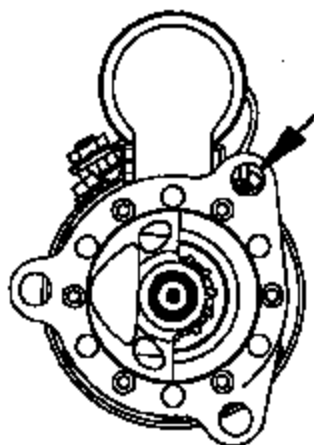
Flange Mounting Hole (Arrow) Aligned with Solenoid Housing Mounting Bolt Shown in the Background When Viewed Through the Flange Mounting Hole
